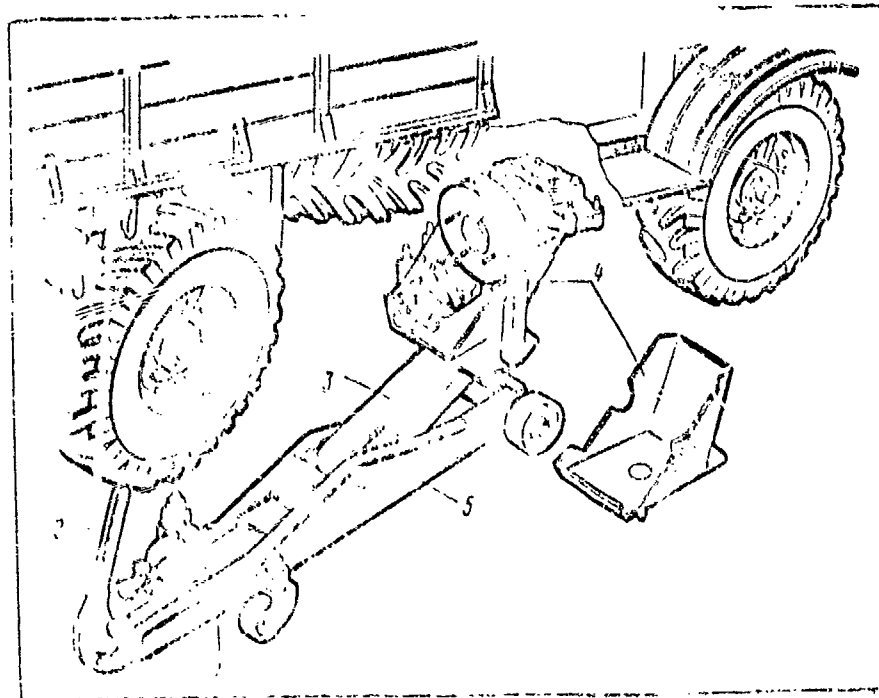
Removing the transfer case from the ZIL-157K motor vehicle:
